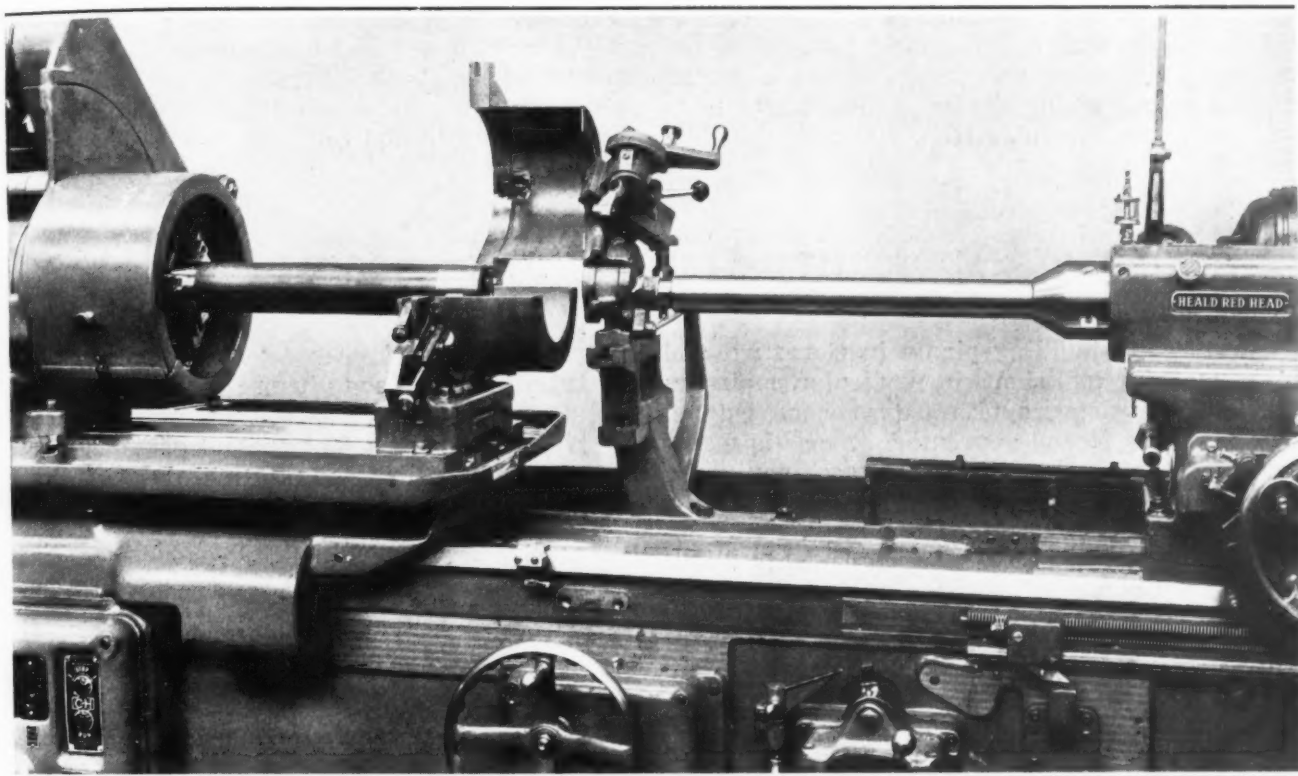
Grinding a Gun Recoil Cylinder Having a Straight Bore over 2 Feet Long, a Taper Seat, and a Curved Surface Joining the Two, with a Cone-pointed Wheel
